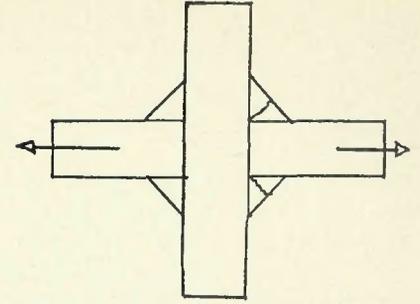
Load bearing fillet weld—small weld. If weld is small enough, fatigue failure occurs through weld—initiated at root of weld. Porosity can reduce fatigue strength
